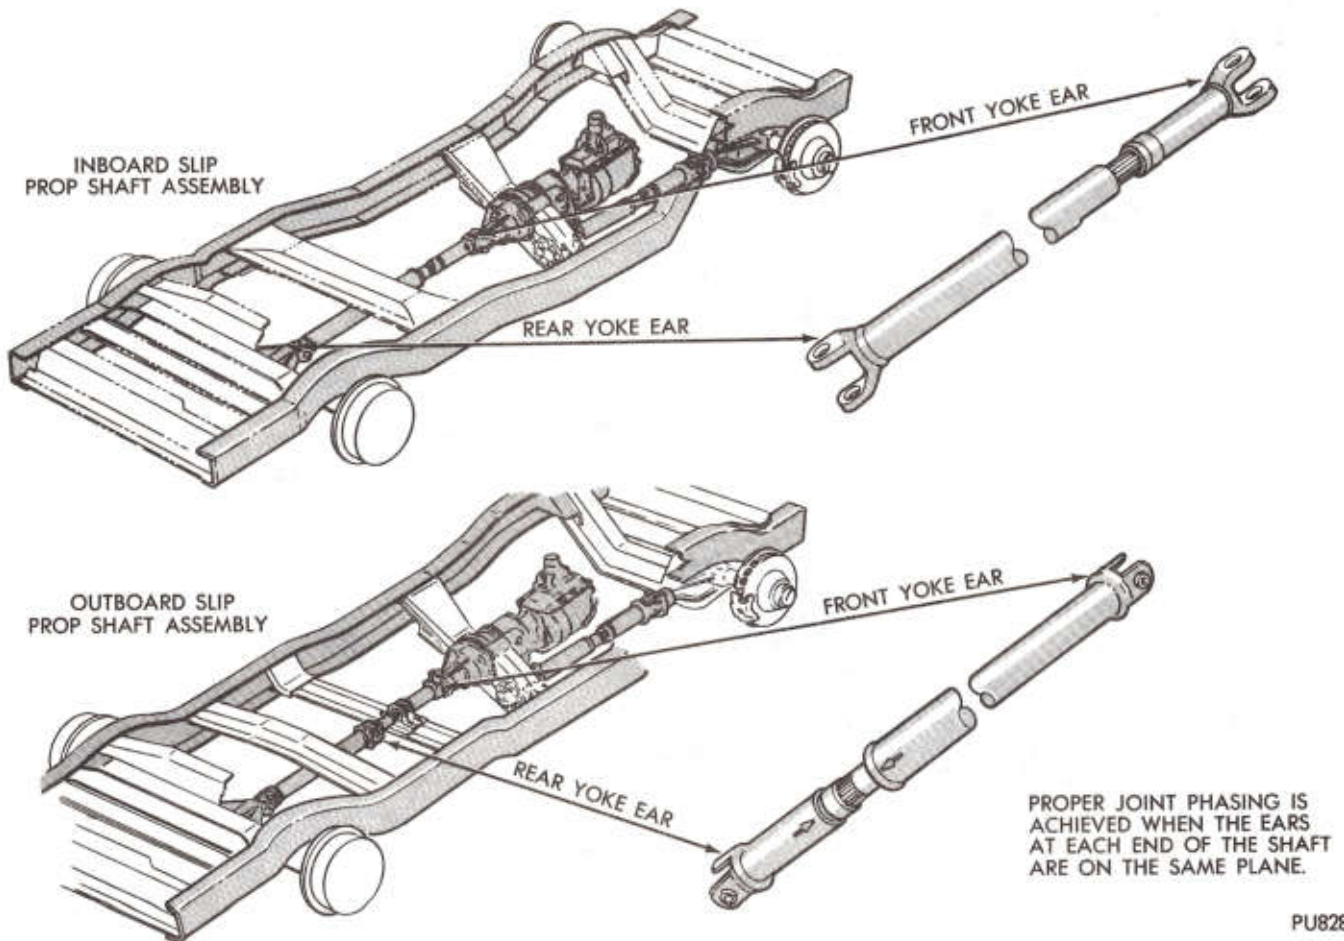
Propeller Shaft Yoke Ears on Same Plane
